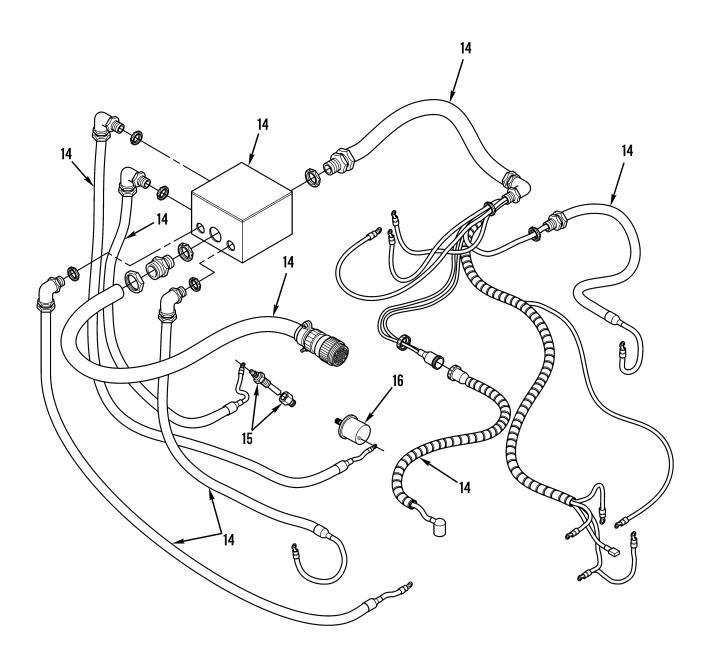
Wiring Harness and Sensors (Sheet 2 of 3)
